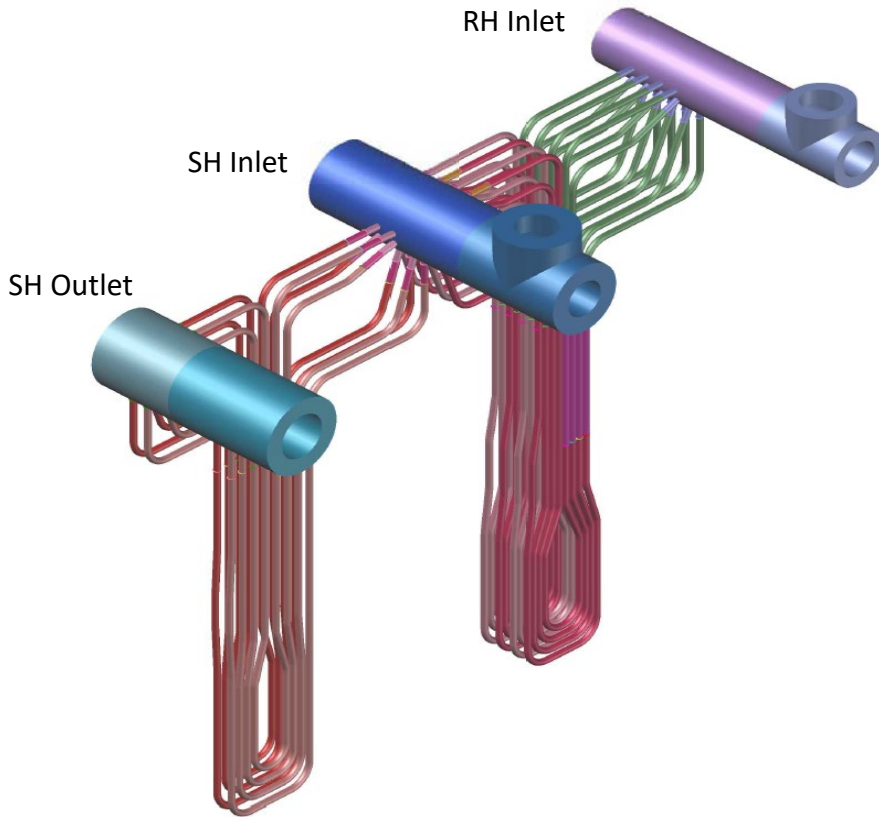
ComTest Superheater-Reheater Assembly (courtesy of GE)
